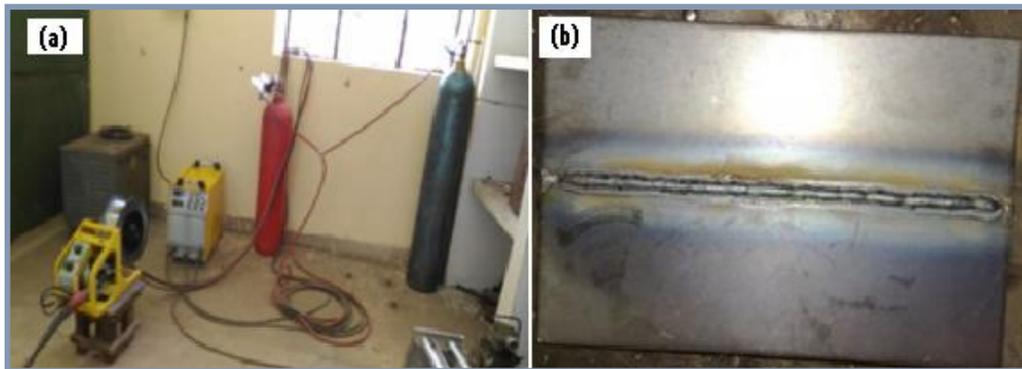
(a). MIG welding setup, (b). Welded component.
